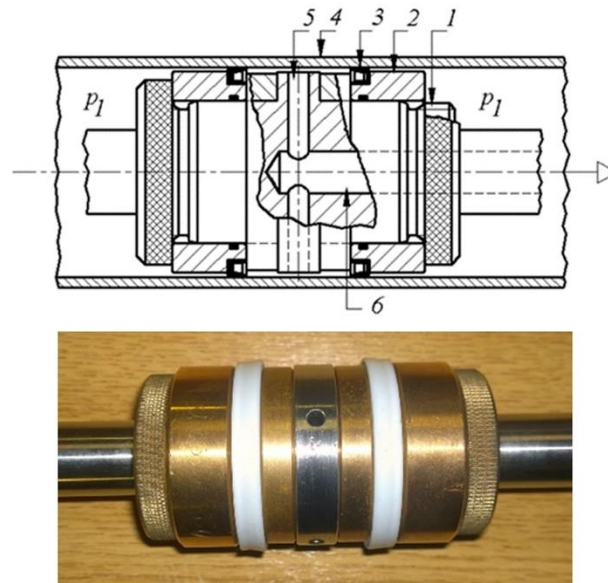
Cross section through piston and cylinder barrel and photograph of piston and seals
